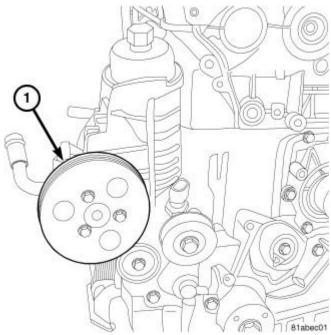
POWER STEERING PUMP PULLEY Courtesy of CHRYSLER LLC
